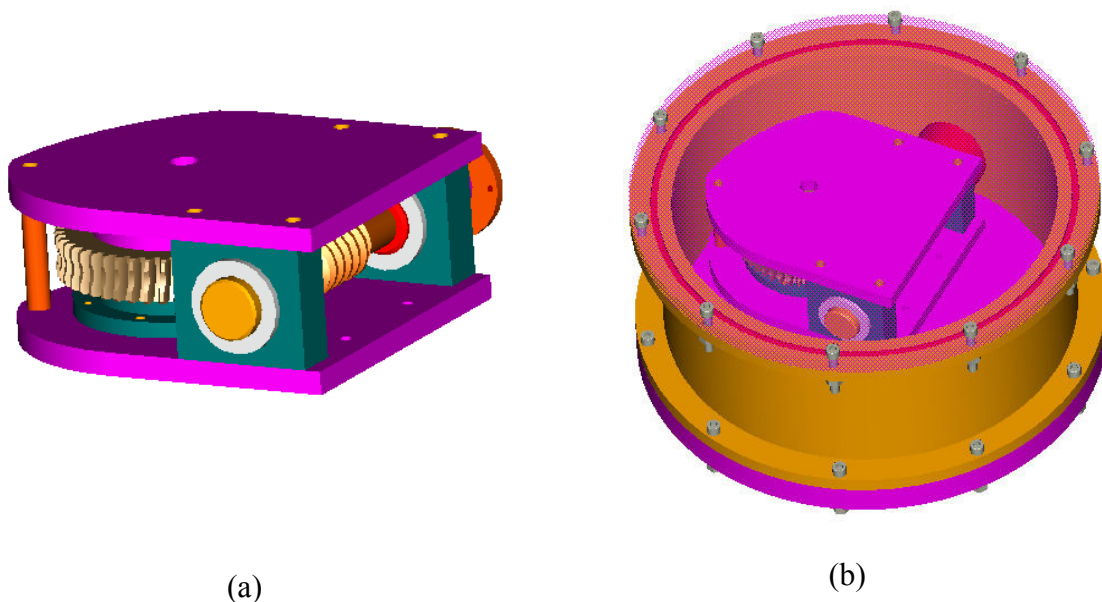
(a) Gear box assembly (b) Vacuum chamber around the gear box
